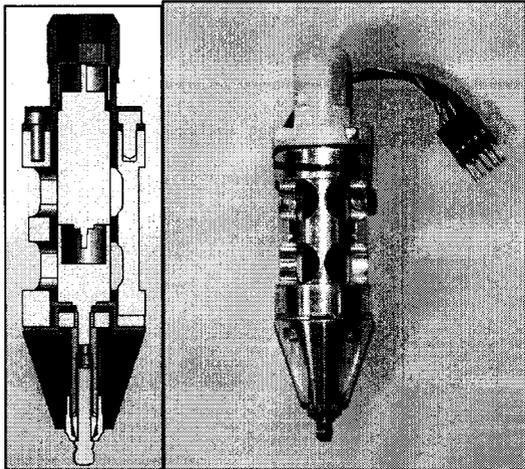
The driver tool has reaction torque sensing and can use any Dremel bit
